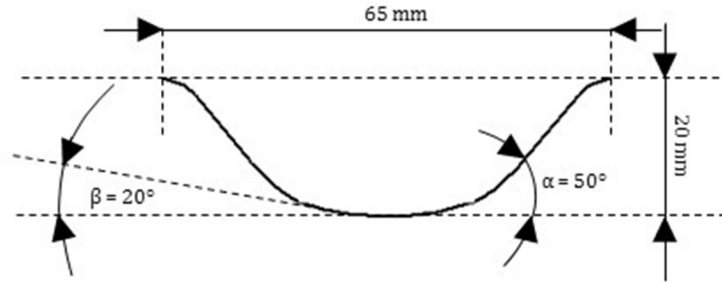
CAD drawing of the desired geometry of an acetabular cup used in hip replacement
